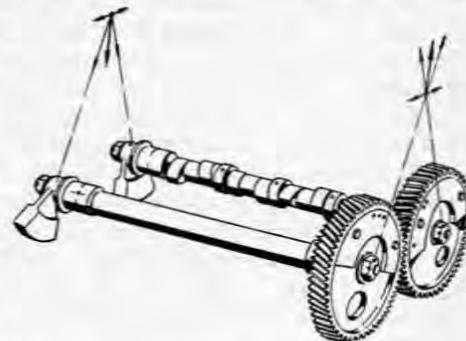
Arrangement for balancing primary couples in a two-stroke engine.
